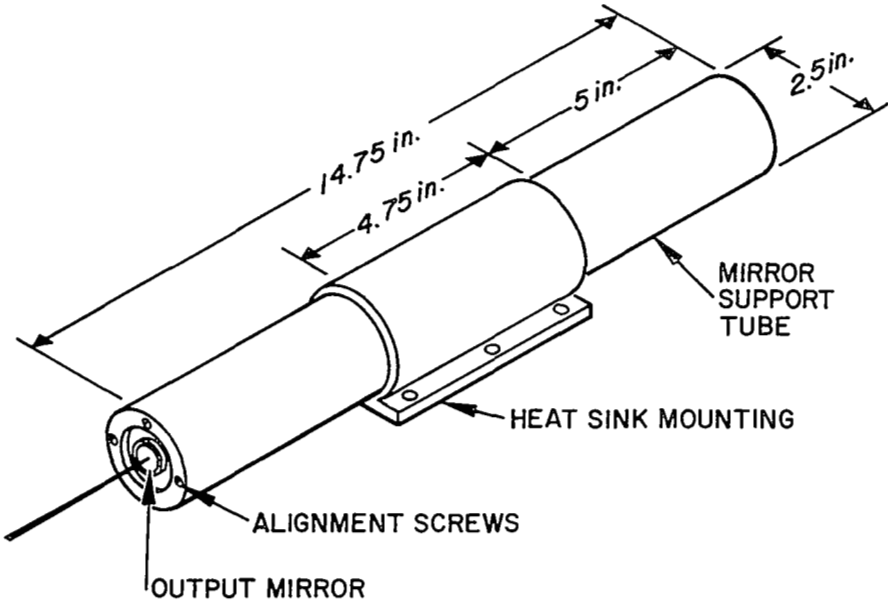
Over-all view of cavity support structure and mounting bracket for 3072H laser.
